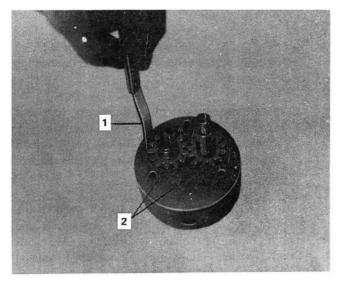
Checking Oil Pump Gear Tooth-to-Case Clearance 2. Pump Gears 1. Feeler Gauge
